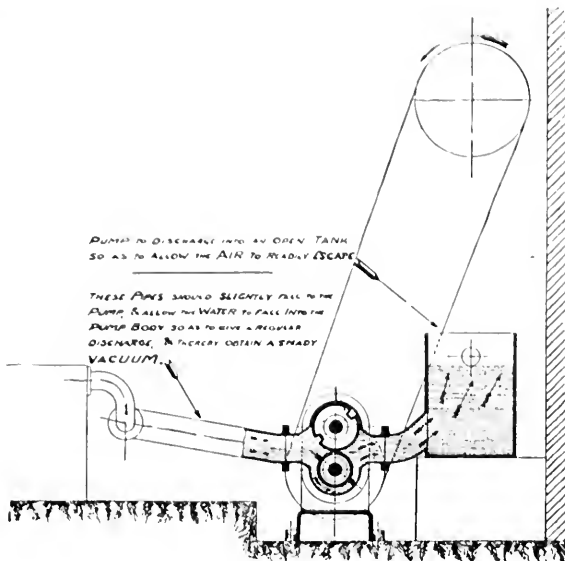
DRUM PUMP APPLIED TO SUCTION BOXES OF PAPER-MAKING MACHINES
